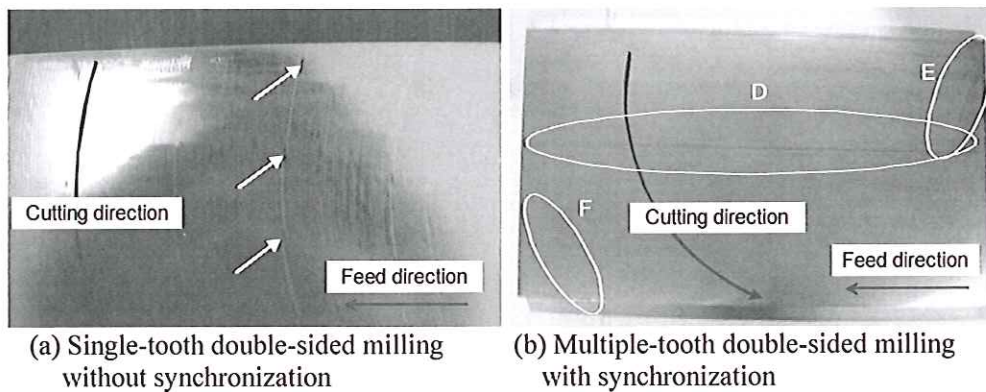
; Photographs of thin workpieces machined with forced chatter vibrations.
